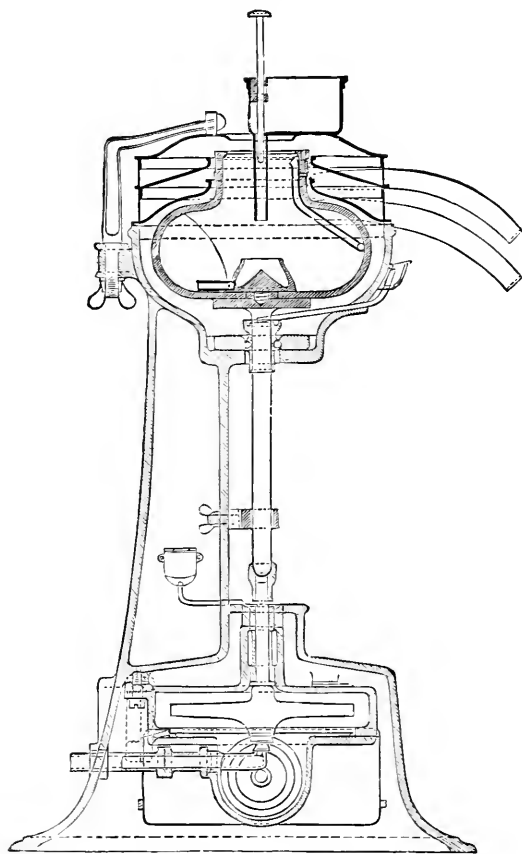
Perpendicular Section of Steam-turbine Separator.
